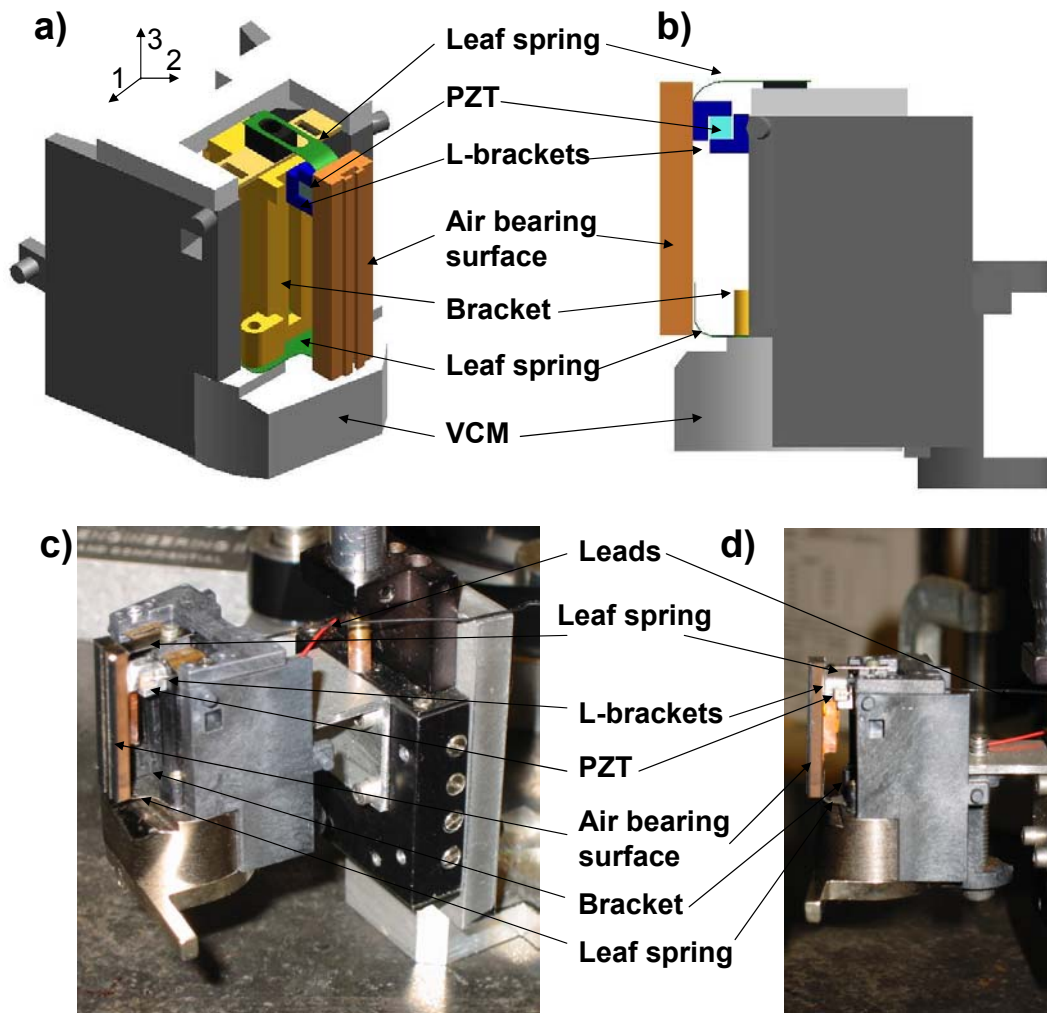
Mechanical design of dual-stage actuator tape head a) isometric view, b) side view, c) isometric view of prototype and d) side view of prototype
